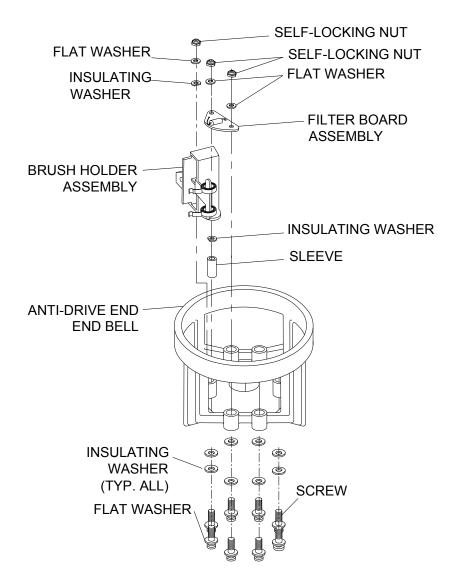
Removing Brush Holder Assemblies (With Filter Boards)
